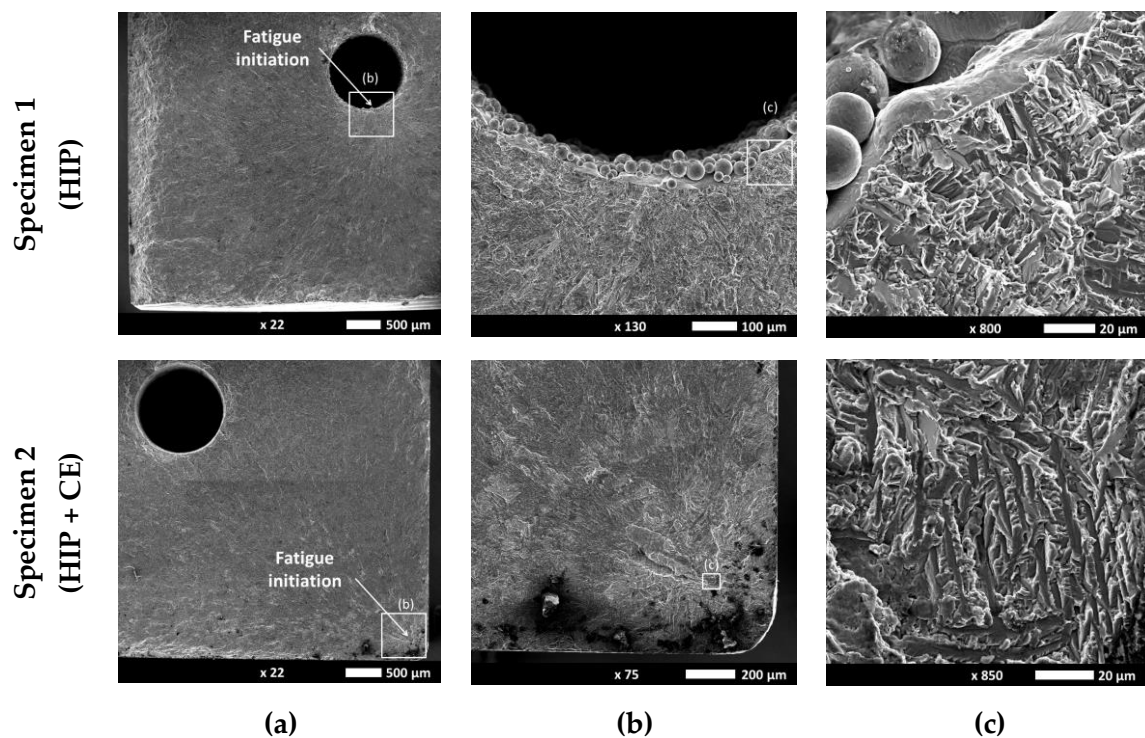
Fracture analysis of Specimen 1 (HIP) and Specimen 2 (HIP + CE). Specimen1: the fatigue crack initiated at the capillary surface due to the as-built capillary surface roughness. Specimen 2: the fatigue crack initiated subsurface near the bottom right corner. The fracture surface of both specimens (depicted in column (c)) shows the presence of facets, a clear indication for the fatigue initiation phase.
